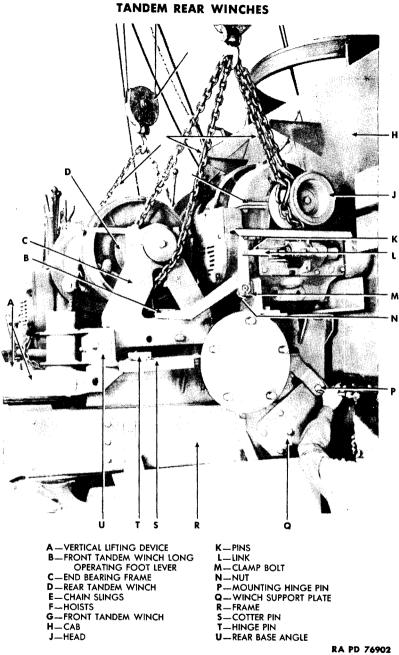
Driving Mounting Hinge Pin from Frame Winch Support Plate
